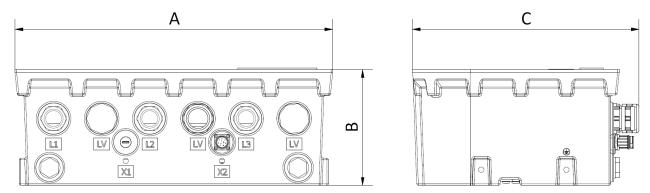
Device dimensions with +CG1 option (example cable gland configuration, 3x M25, 1x M32 cable glands and 2x M32 plugs)
